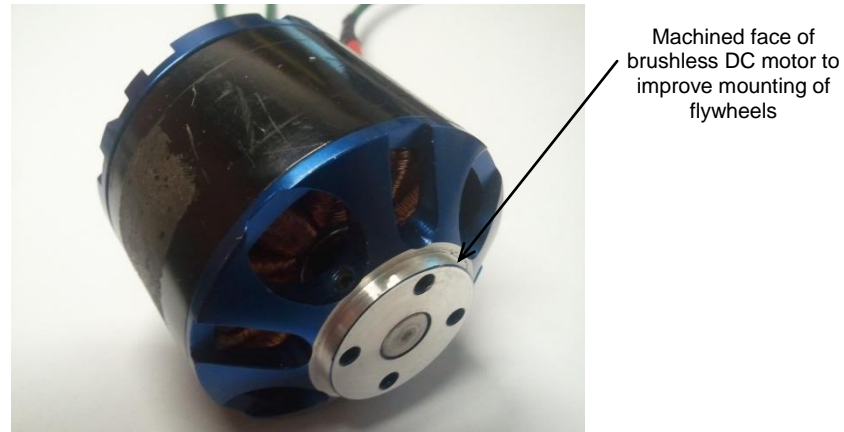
Brushless DC motor showing machined mount face for mounting of flywheels
